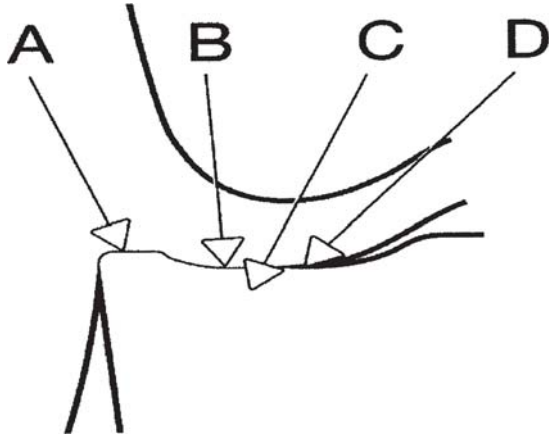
Wear zones on the cutting tool caused by chip formation (Ref 1)
